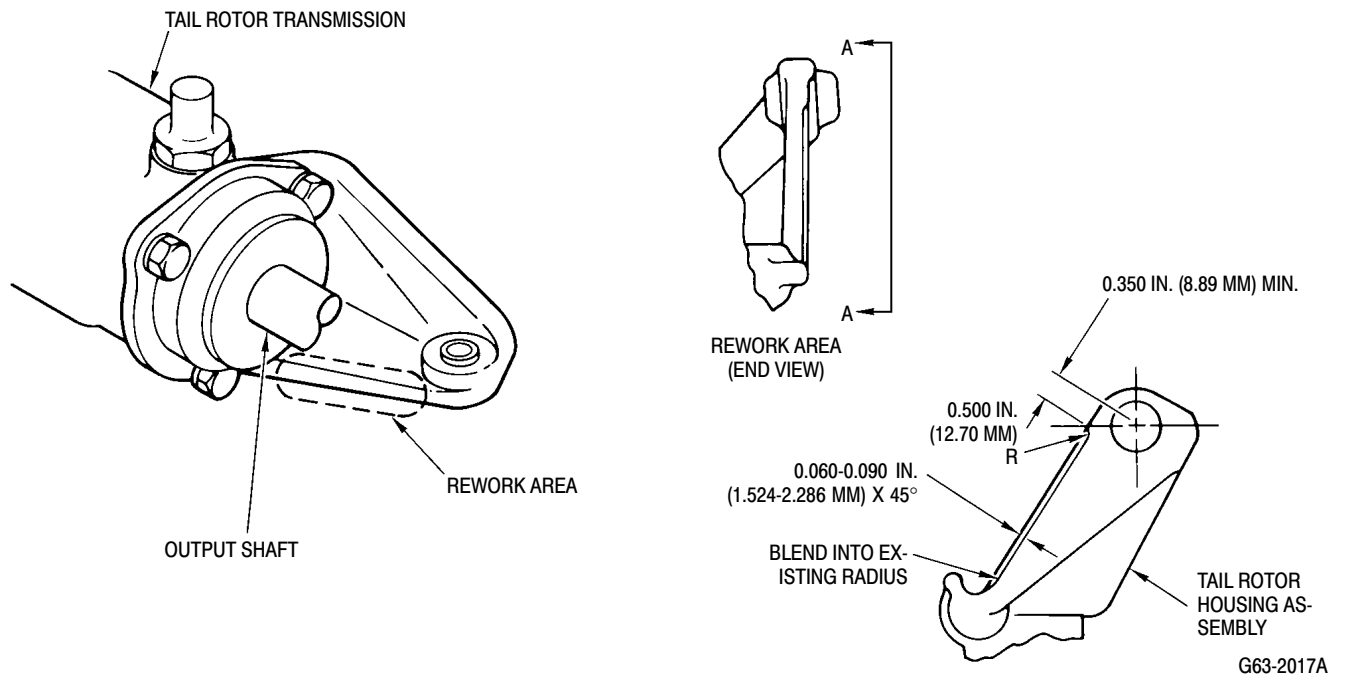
Rework of Tail Rotor Transmission Housing Assembly
